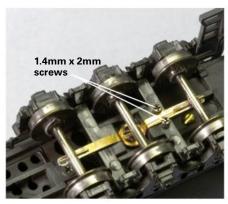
Wiper fix. The wipers would occasionally get off center and not make good contact with the axles. To remedy this, Peter put a 1.4mm x 2mm screw on each side of the front wiper.
